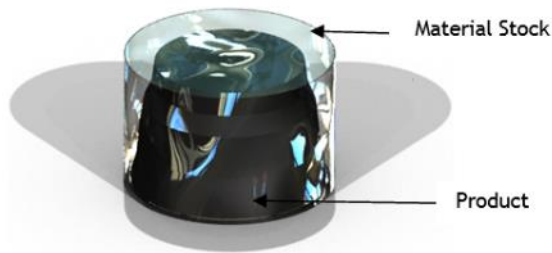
Subtractive manufacturing where the material stock is removed to manufacture a product.
